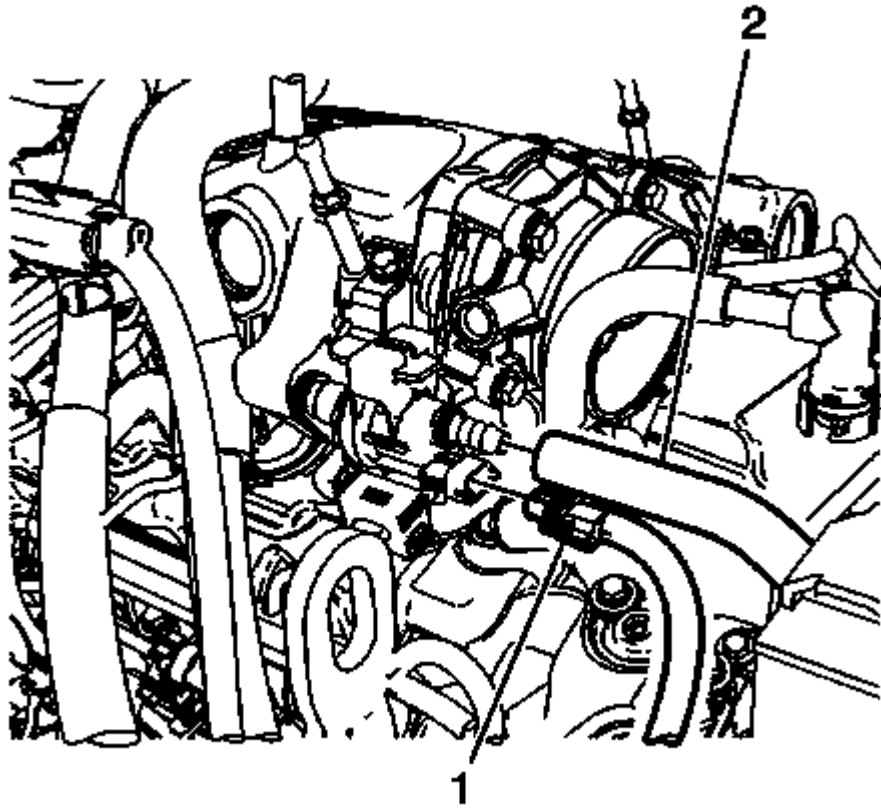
Identifying Purge Solenoid Valve Electrical Connector
